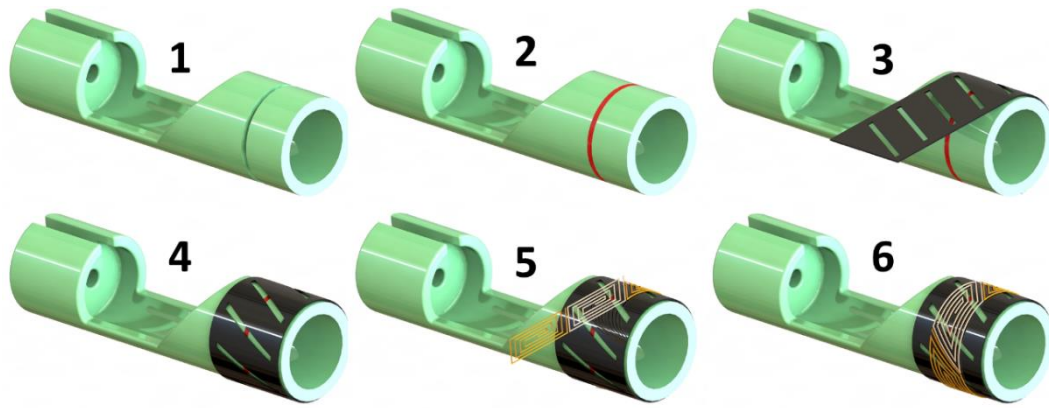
Eddy current probe for inner diameter tube inspection with the MPPS technology assembly sequence.
